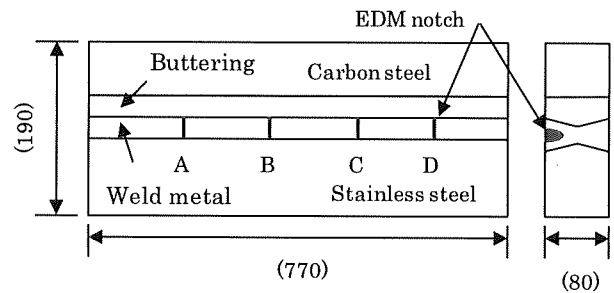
Nickel based alloy weld specimen with EDM notches in weld metal area
